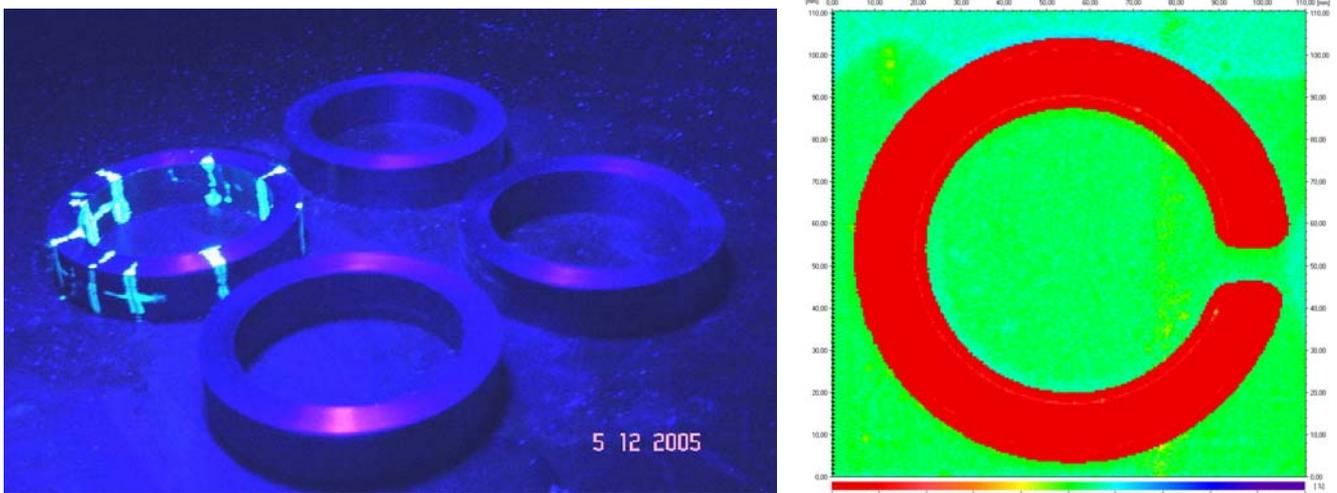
a) Three friction welded parts (with no defects) and reference part (with multiple weld defects) in the dye penetrant testing and b) ultra sonic scan of a friction welded test piece
